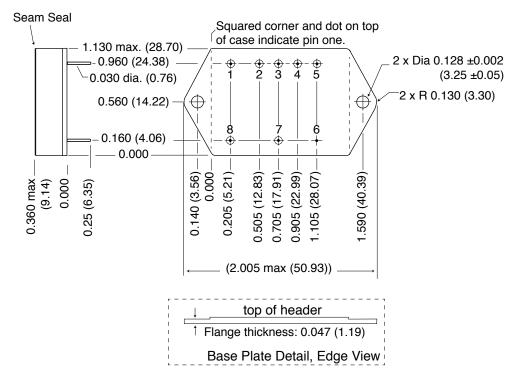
MFK SINGLE OUTPUT FLANGED
